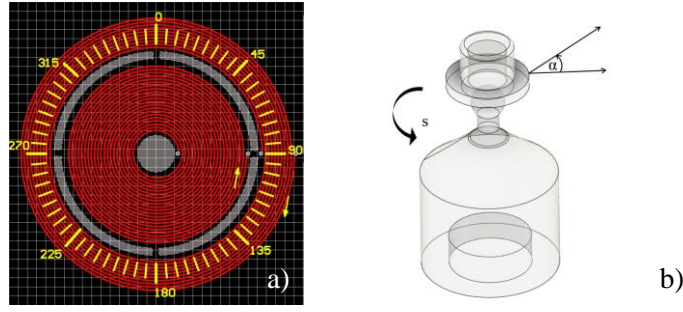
a) Layout of coils in Altium designer (grid 1 mm). b) Pivot with cylinder for inner coil L_{in} .
